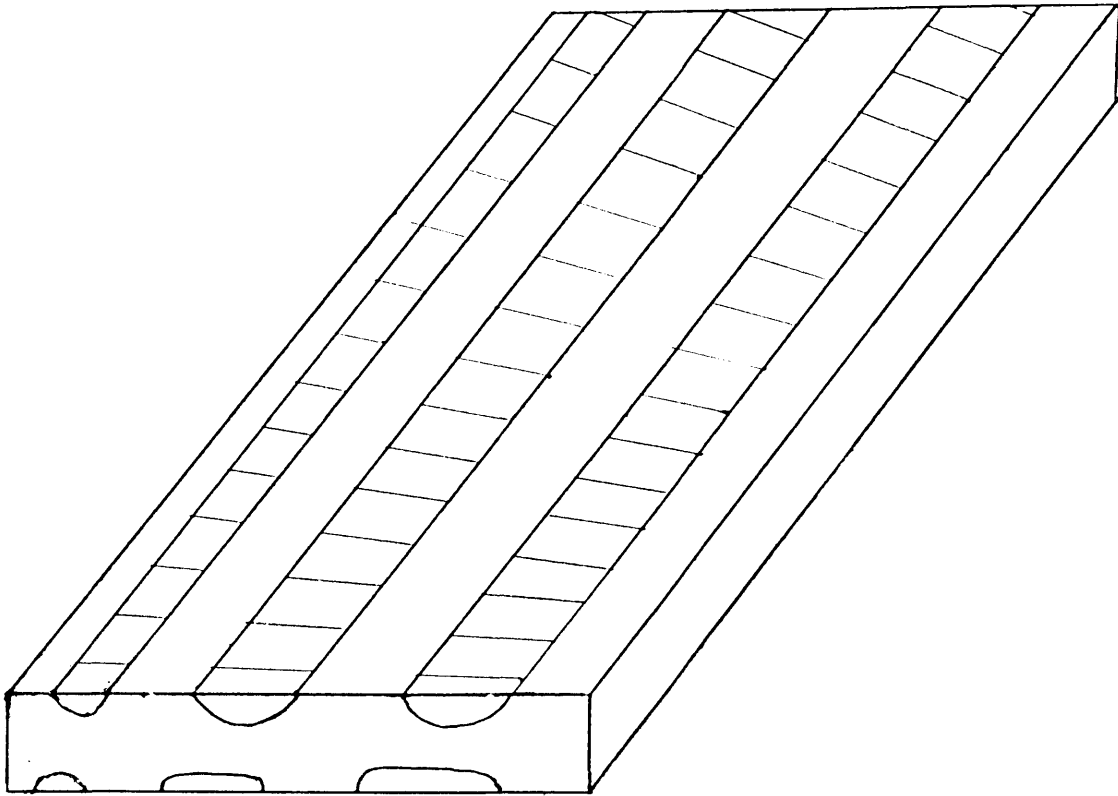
Orientation of "Bead-on Plate" Weldments
